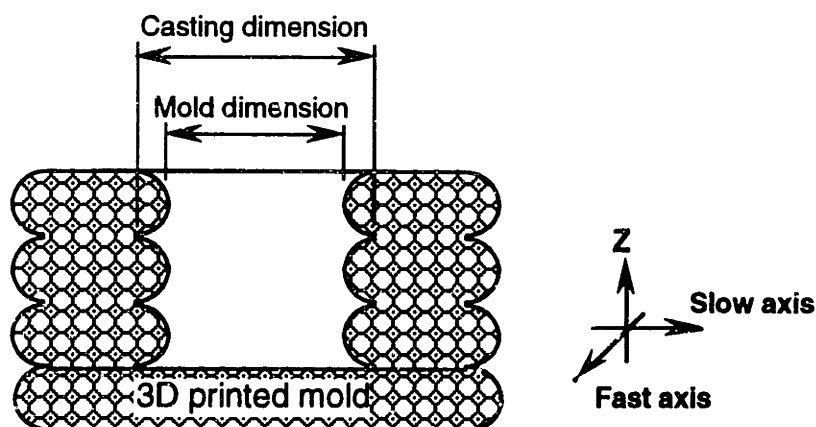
Cross section of 3D printed mold showing discrepancy between mold and casting measurement of the same feature.
